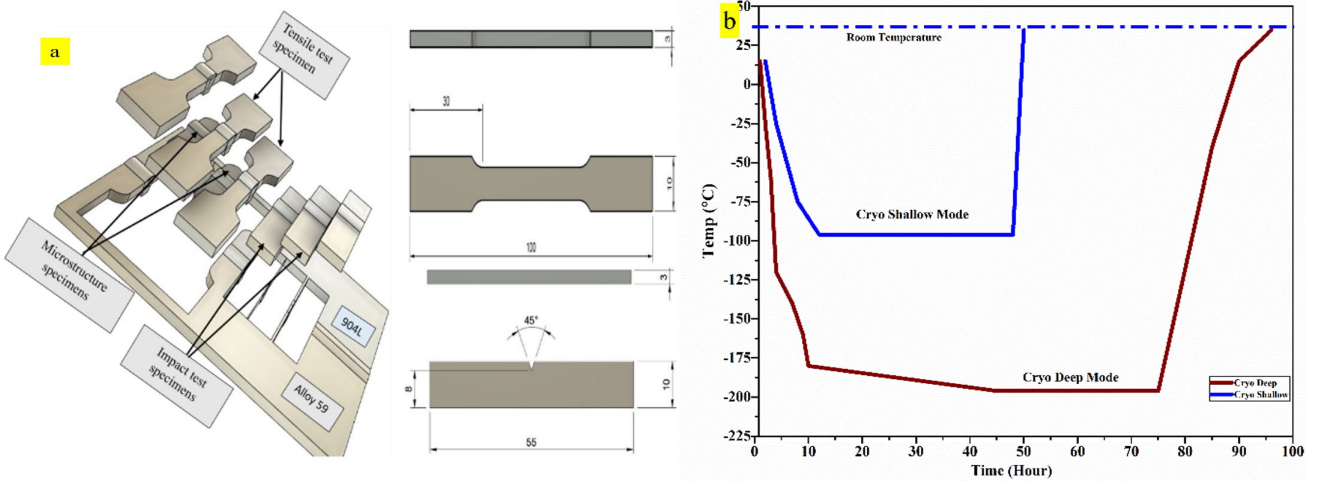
(a) Specimen preparation as per ASTM standard using Electrical Discharge Machining (EDM) from dissimilar weldment. (b) Cryogenic treatment cycle
